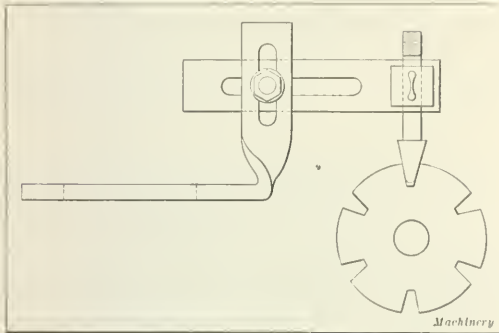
Tool Grinder Attachment for use in grinding Hobs
